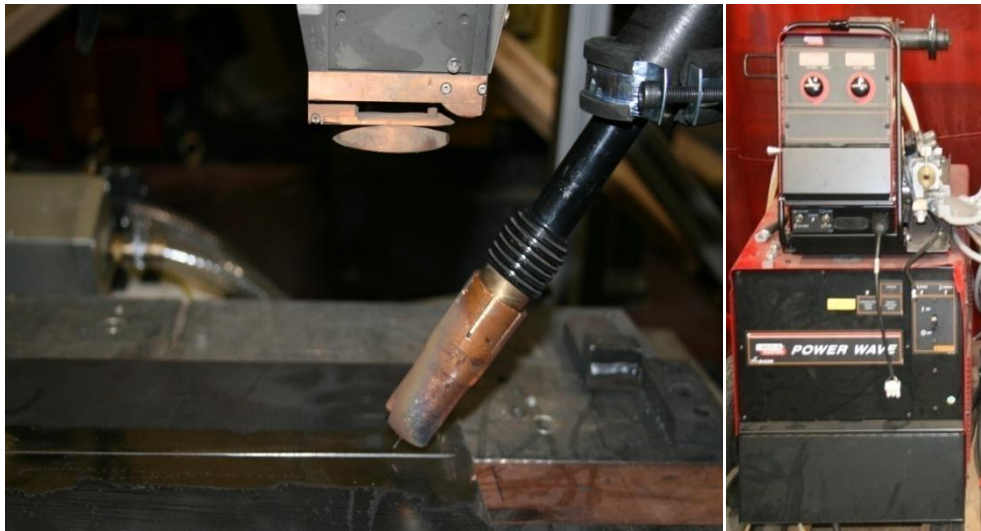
Experimental set-up and arc power source used in hybrid laser/MIG welding.
